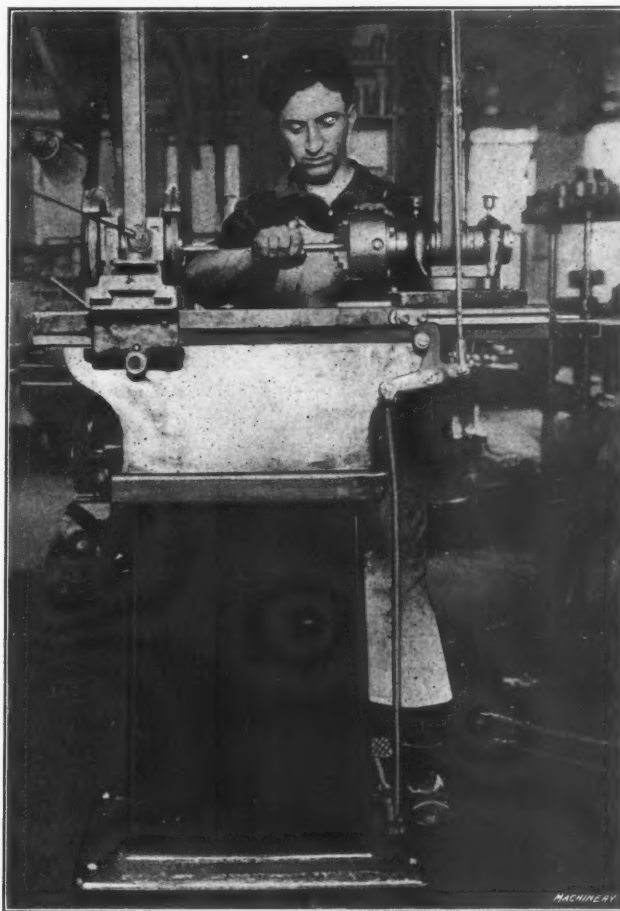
Rear View of "Capital" Internal Grinder, showing how the Work Chuck is stopped automatically
